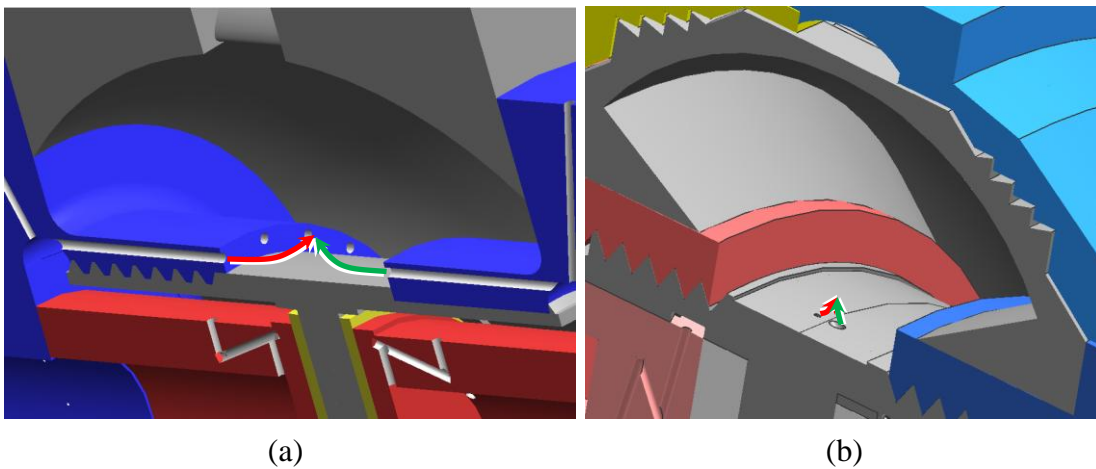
Common Shaft Injectors (a) Original Design – Outer Shaft Injectors (b) Final Design – Common Shaft Injectors
